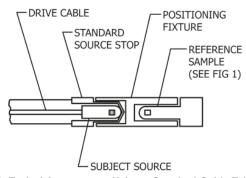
Typical Arrangement Using a Standard Guide Tube and Special Positioning Fixture
